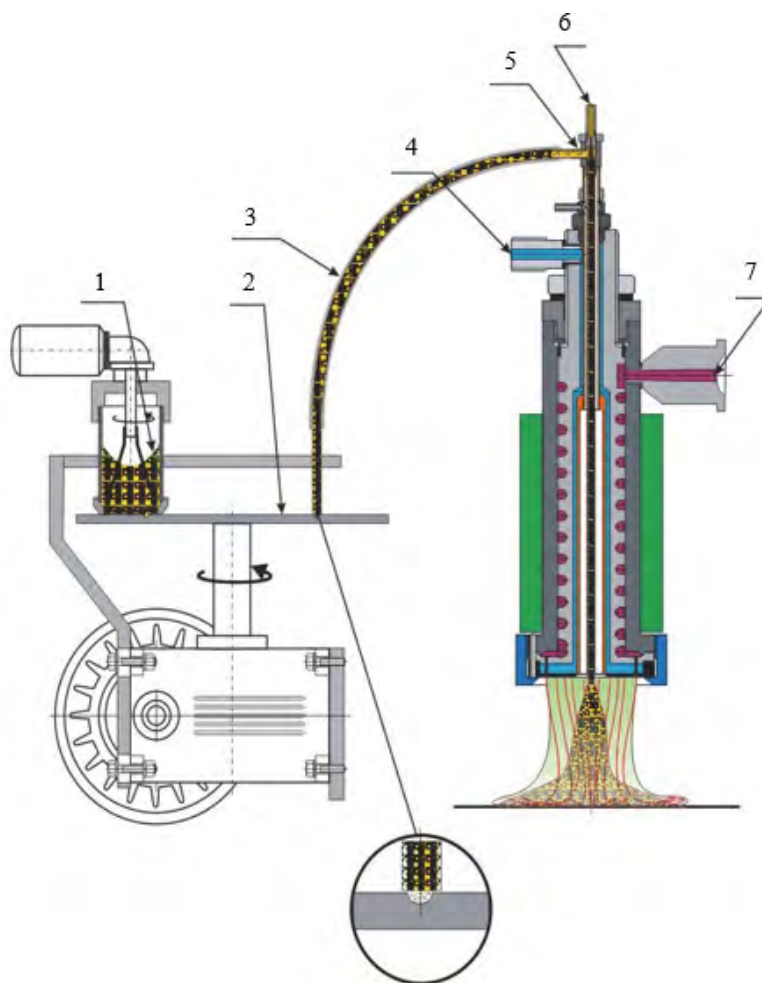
Head unit and the modifier dispensing assembly: 1 – mixture of modifiers; 2 – dispenser; 3 – connecting tube, 4 – hot air; 5 – injector; 6 – compressed air; 7 – melted polymer
